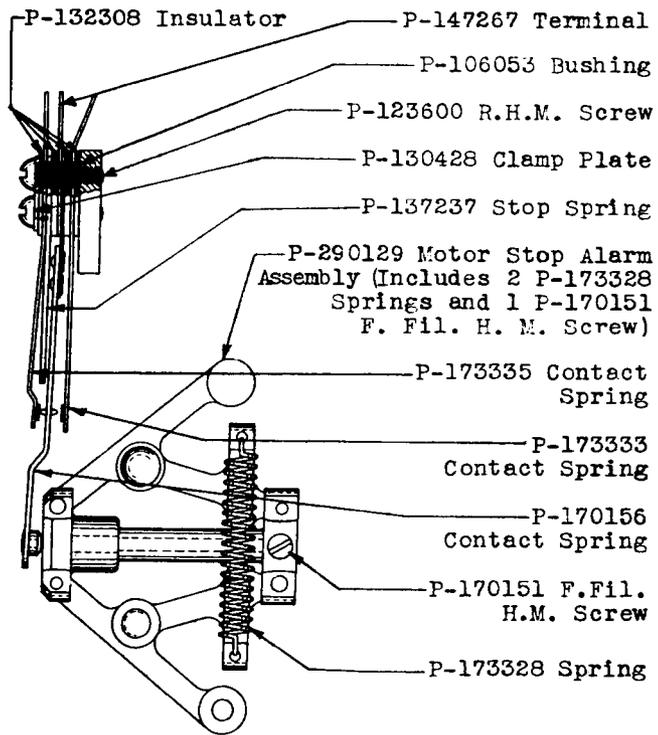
Motor Stop Alarm and Associated Parts (No. 168B Interrupter)
